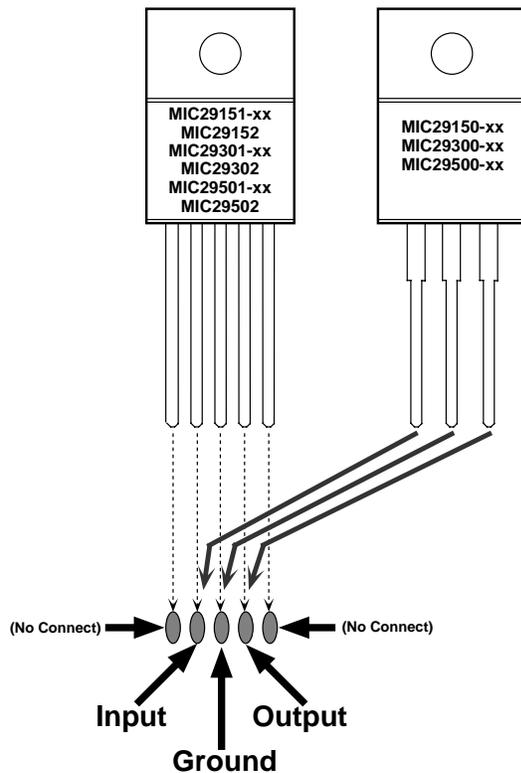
PC Board Layout for 5-Pin and 3-Pin Regulators
